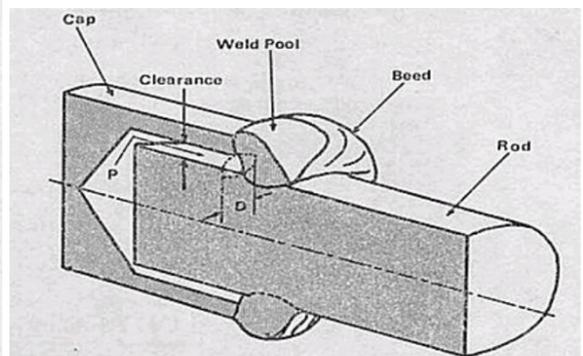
Schematic representation of weld pool in weld joint.
